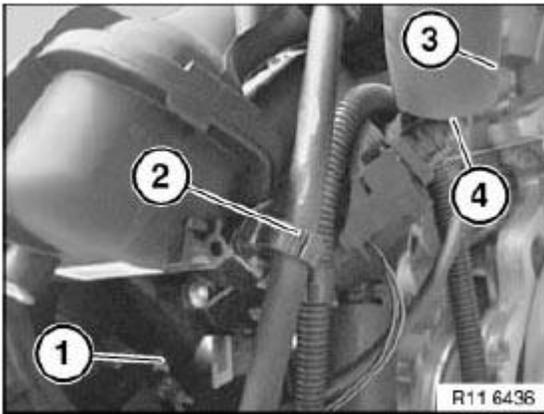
Identifying Plug Connection, Holders And Crankcase Breathers
